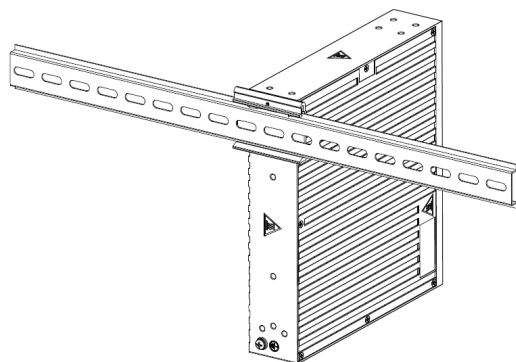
DIN Rail Mounting Option 1: Secure the Port Extender
